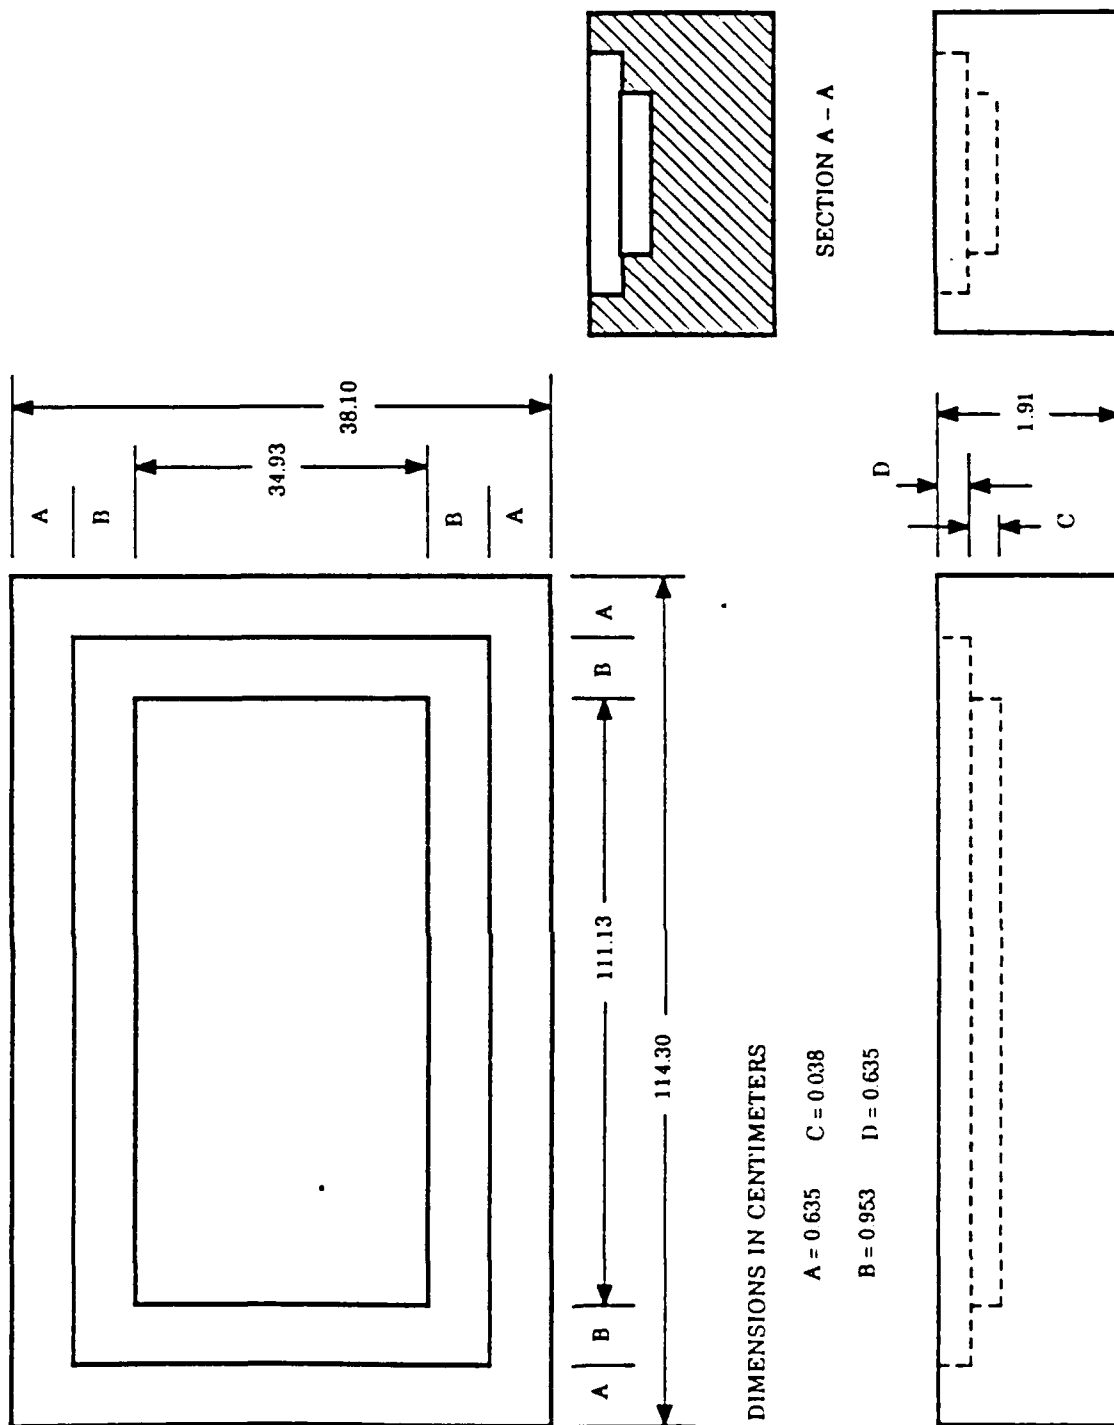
Design Drawing of the Pocket Plate Configuration.
